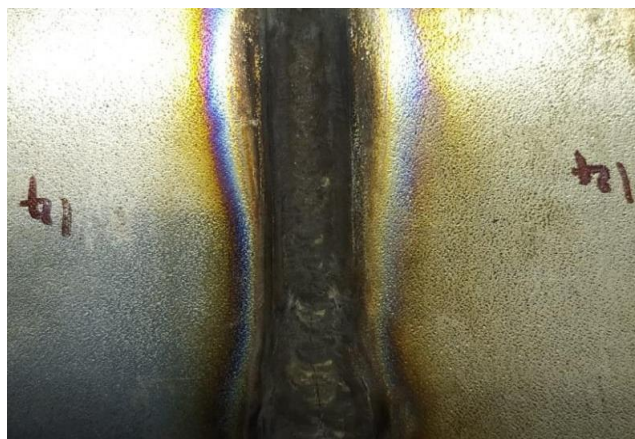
Top surface appearance of Inconel 718 joint welded by plasma arc welding corresponding to arc current of 85 A, gas flow rate of 12 LPM and 4 mm/s welding speed
